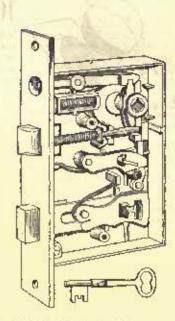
Front-Boar Lock.- Hepkine & Dick. inson Mig. Co.
